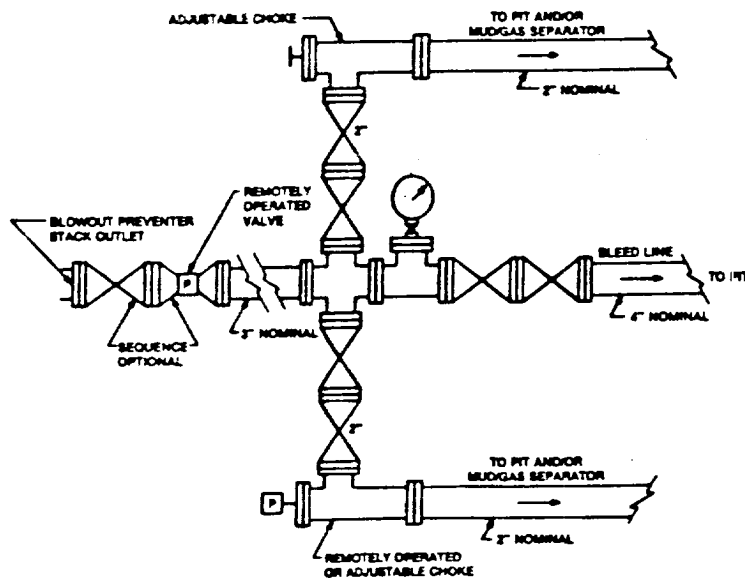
Typical choke manifold assembly for 5M rated working pressure service — surface installation.
